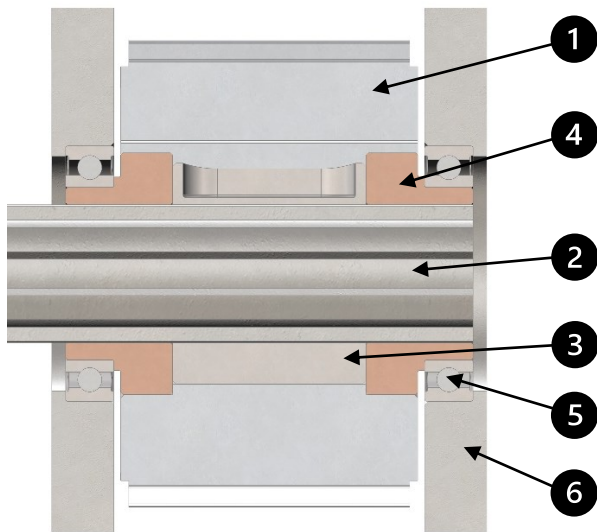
Cross-section of driving pulley assembly. (1) Pulley. (2) Splined shaft. (3) Splined hub. (4) Bearing seat hub. (5) Ball-bearing. (6) Mounting bracket.
